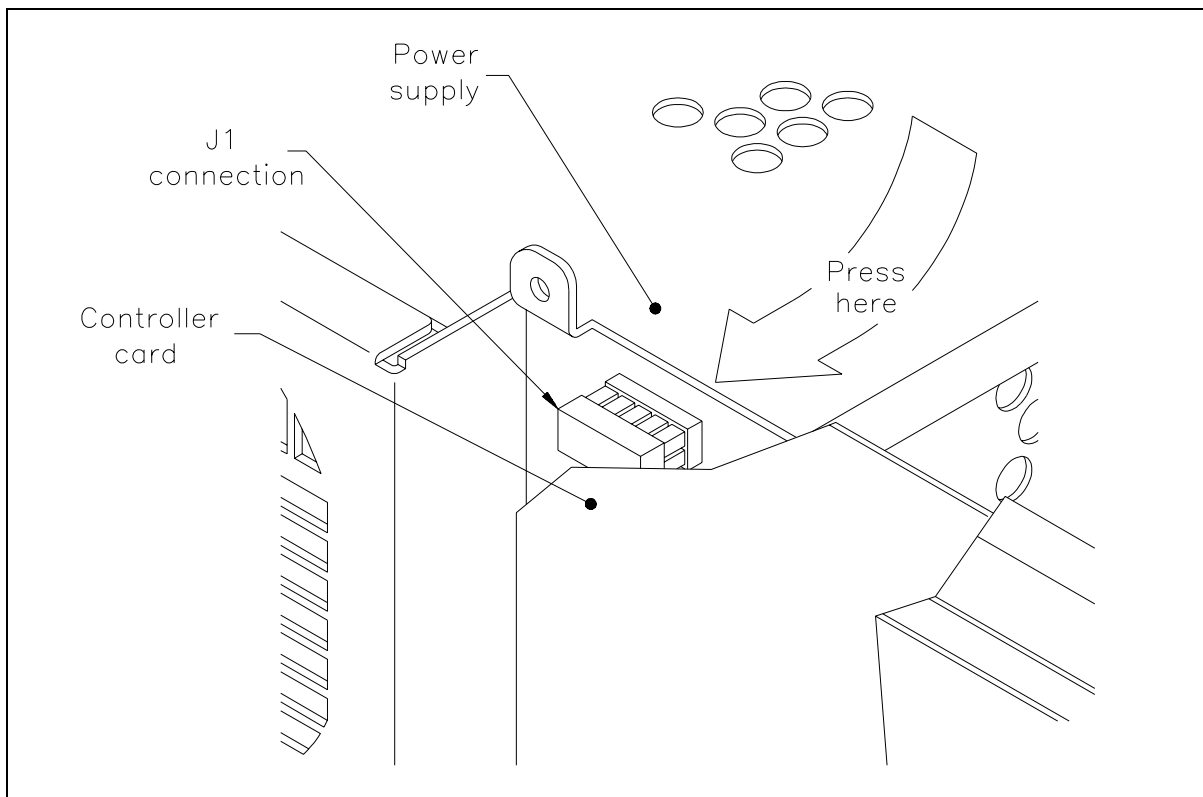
Attaching the controller card's J1 connector to the power supply
